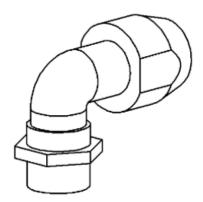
Screw-on nozzle 90° rotatable (2300107)
